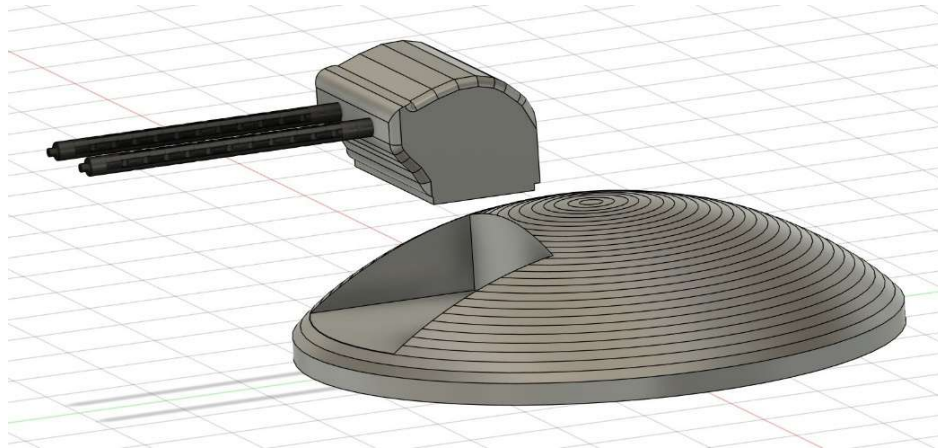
50 Caliber Machine Gun Turret 3D Model
